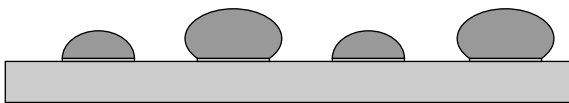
Schematic of solder bumping size consistency problem encountered in electroplated solder bumping for wafers
